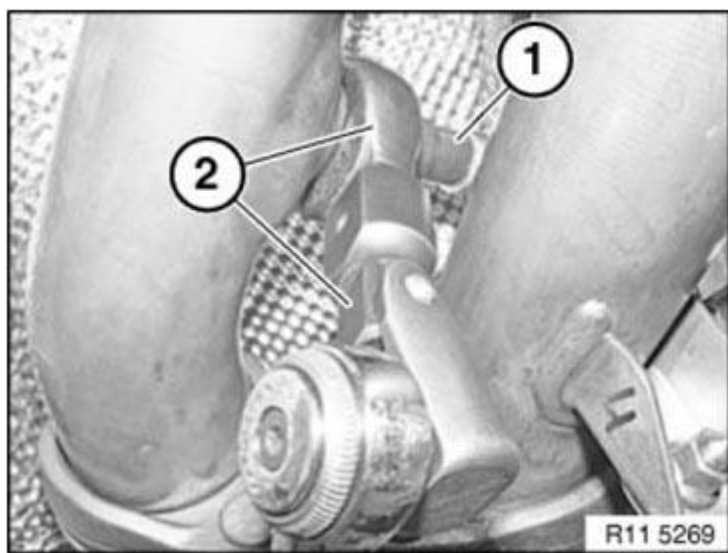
Removing Lambda Monitoring Sensor Plug Connection Using Special Tool (11 9 150)
